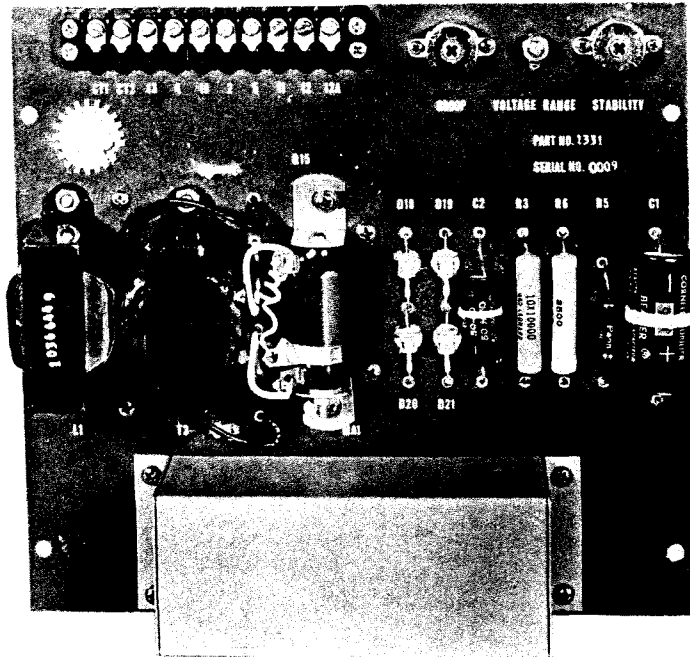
(REGULATOR MODULE SUB-ASSEMBLY. 1331)
